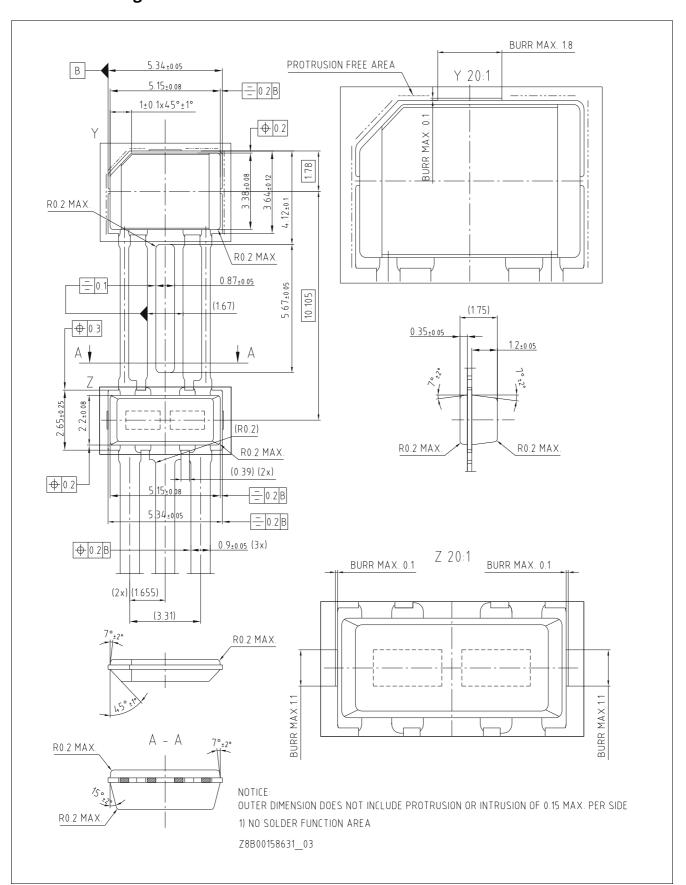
PG-SSO-3-5x (Plastic Green Single Slim Outline), Package Dimensions
